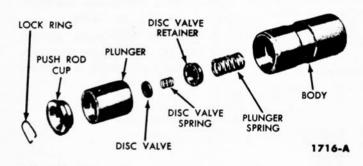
Typical Hydraulic Valve Lifter Assembly
